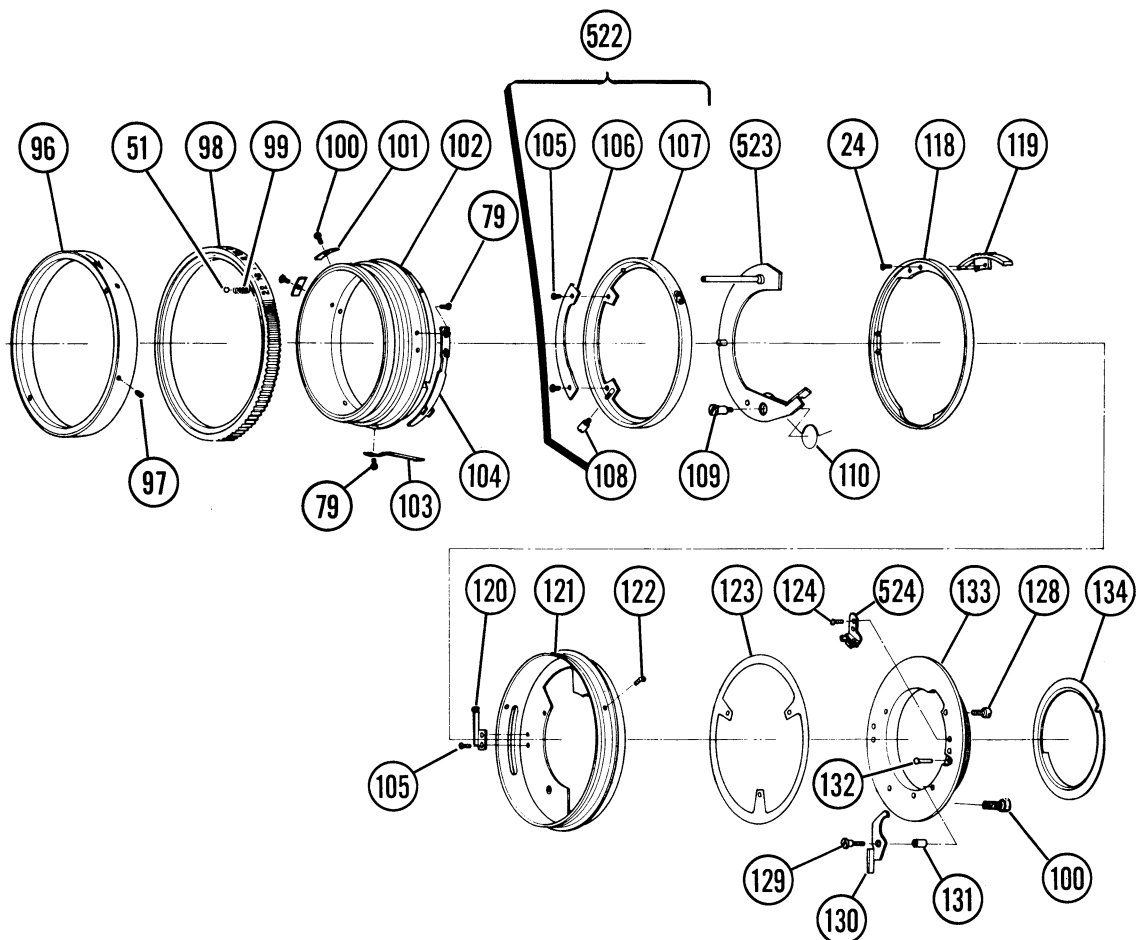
Mount Assembly, Universal (Ref. 547, Pg 58)
